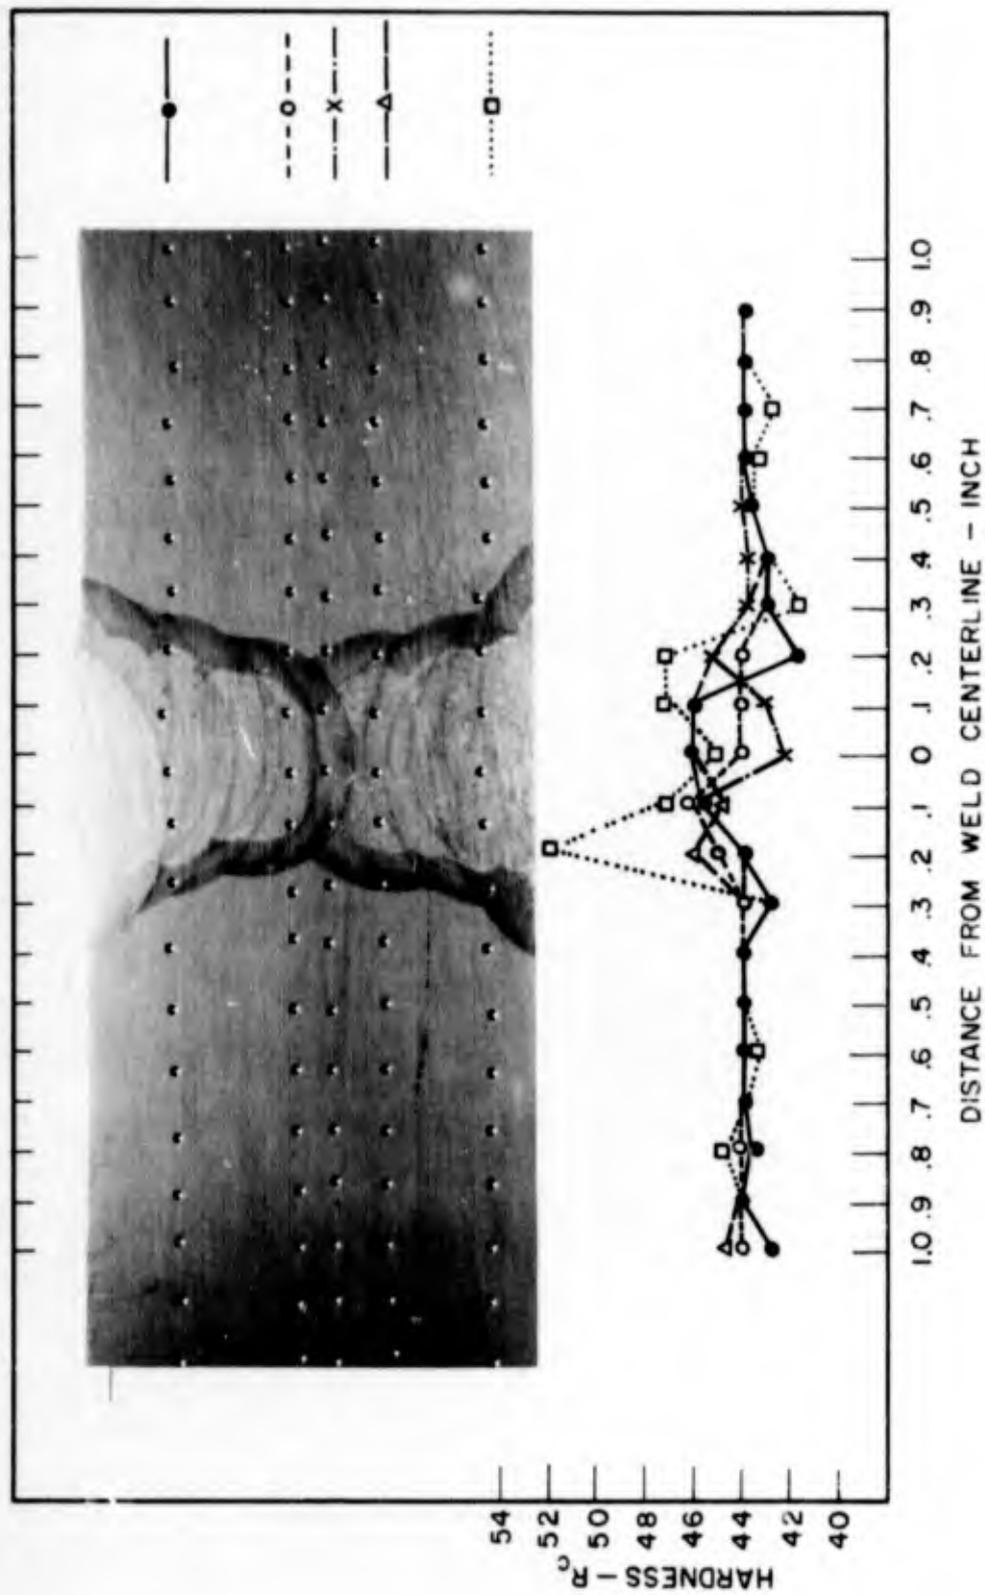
Hardness Survey of Multipass TIG Weld No. M282 Made in HP 9-L-25 1-Inch Plate. Weld was Made in Helium at a Welding Speed of 10 ipm Using Filler Wire No. 15 and a Double U-Groove Joint Design.
